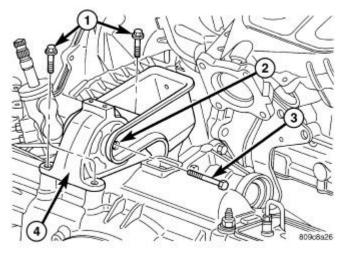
Removing/Installing Rear Engine Mount Courtesy of CHRYSLER LLC
